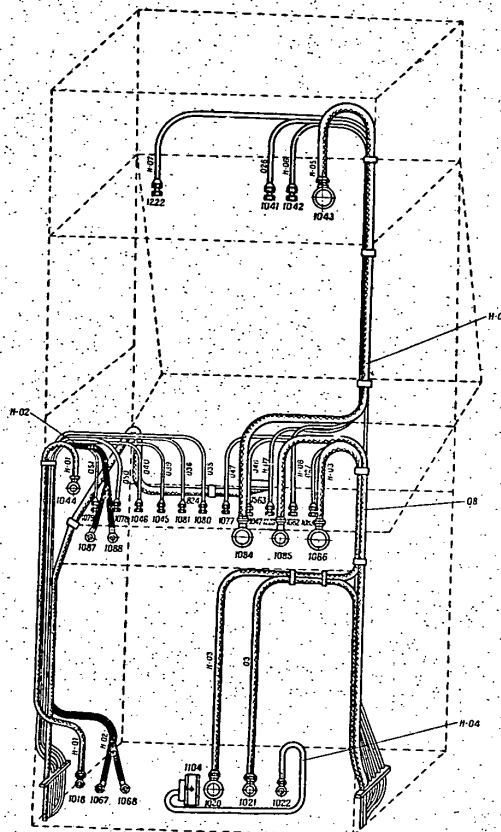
Wiring Diagram of Indicator Cabinet HQ-02
